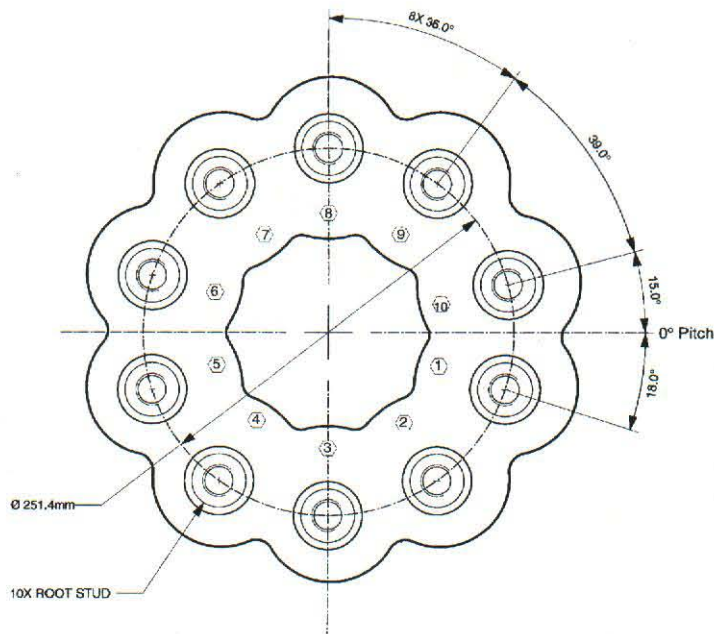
Drawing of the ERS-100 Blade Root Attachment
